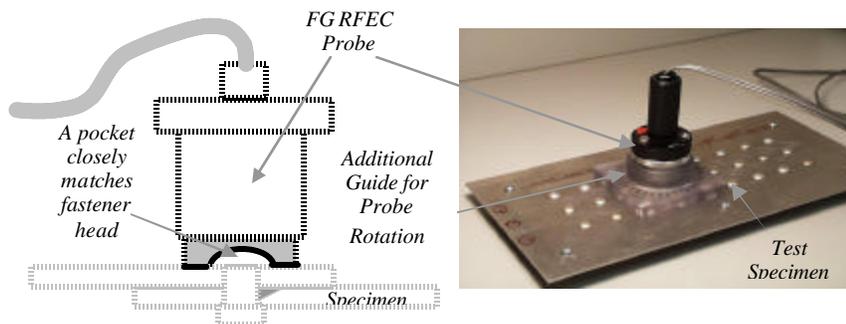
Rotational FG RFEC probe applied to raised-head fastener.
